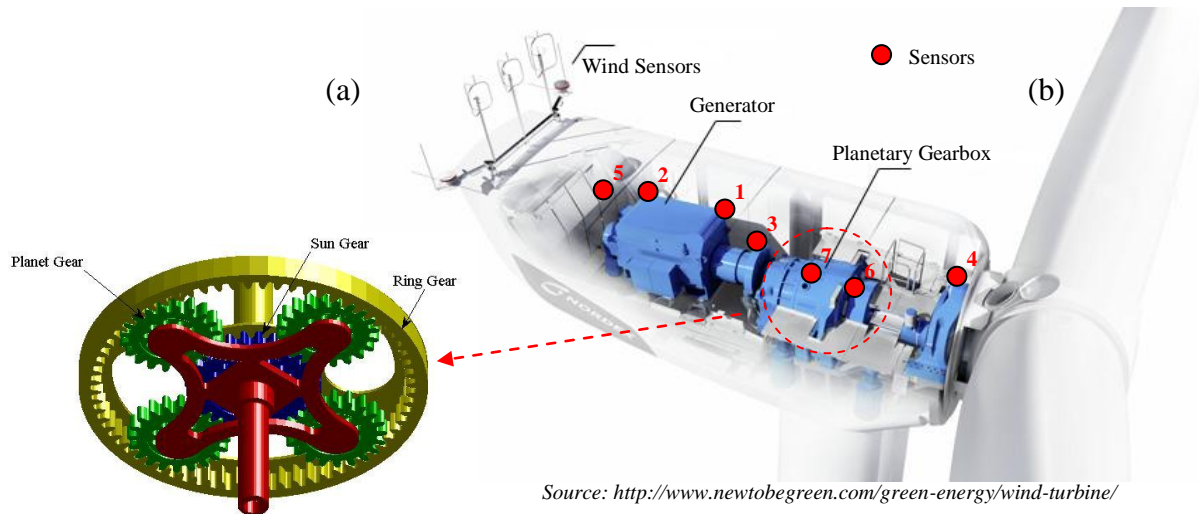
(a) Planetary Gearbox System (b) Wind Turbine
